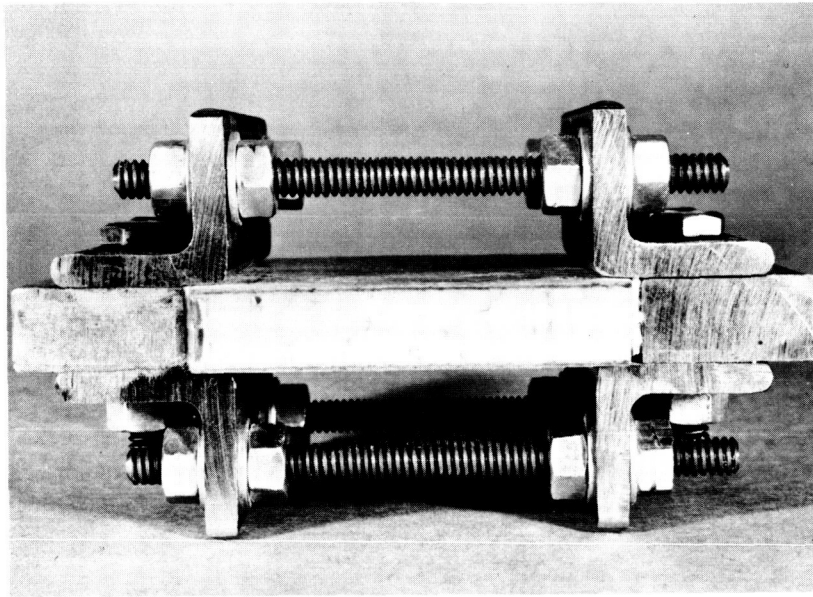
Specially Designed Test Fixture for Testing Upper Sandwich Panel in Edgewise Compression
